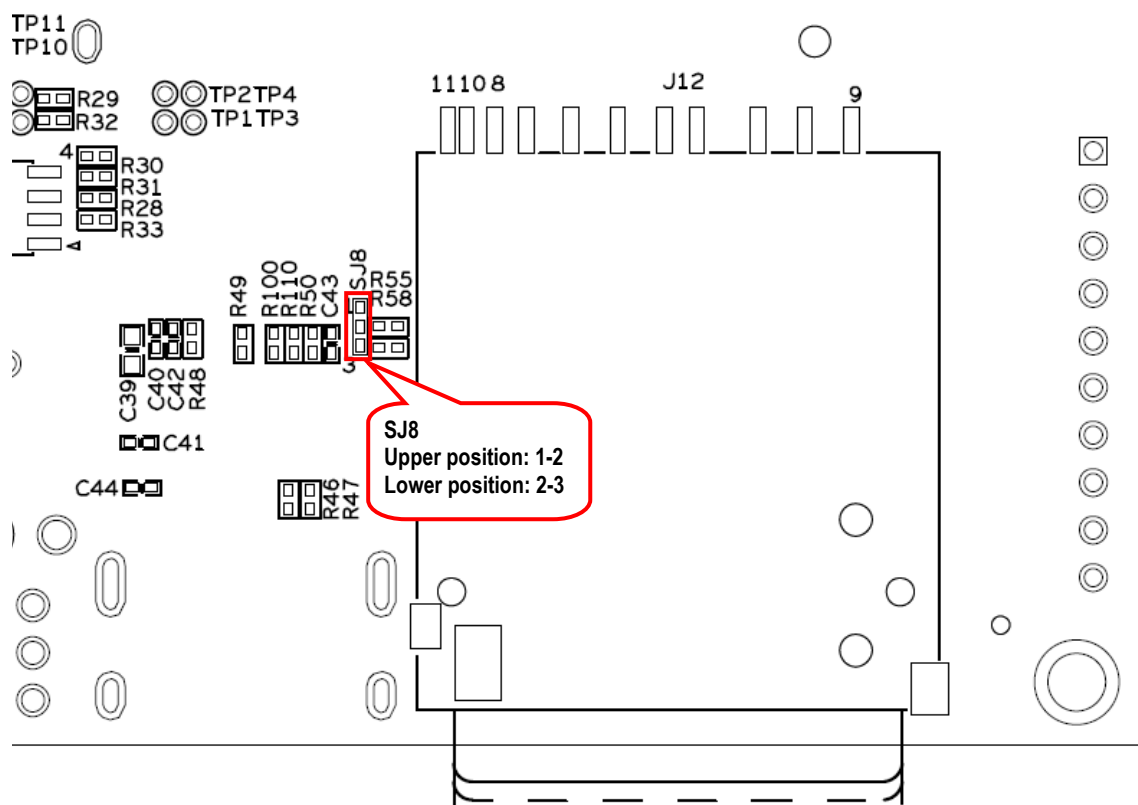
Location of SJ8 on COM Carrier Board (V1)
